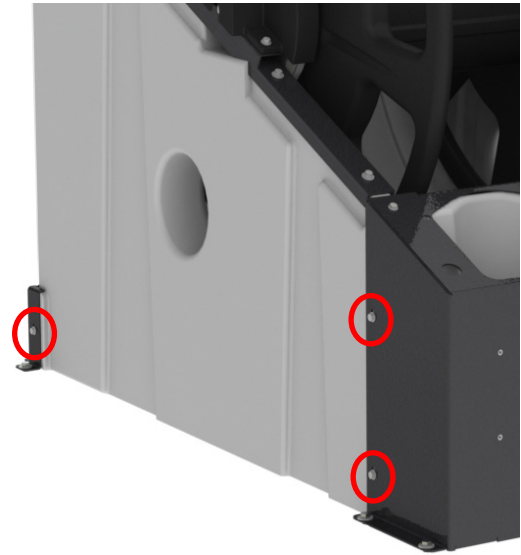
Loosen But Do Not Remove 3 Bracket Bolts
